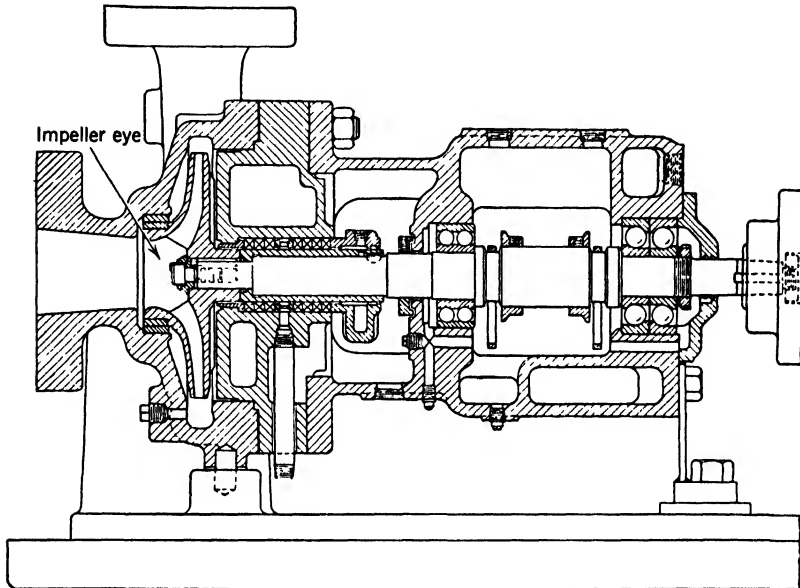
Ingersoll-Rand single-stage hot-oil pump.
